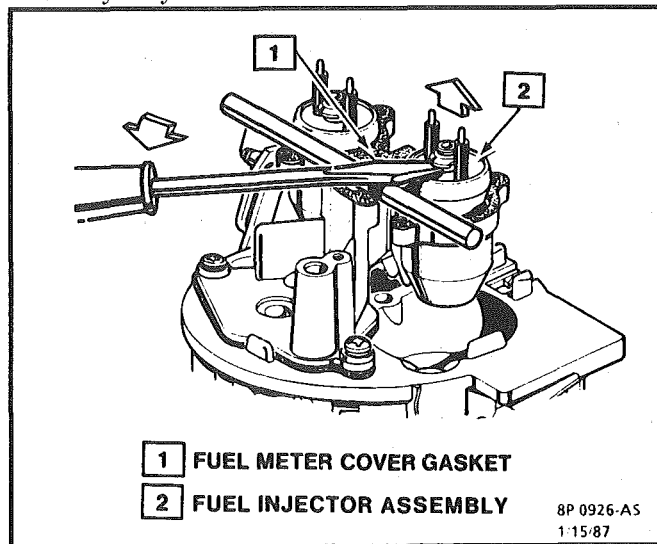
11 - Removing TBI 220 Fuel Injector
